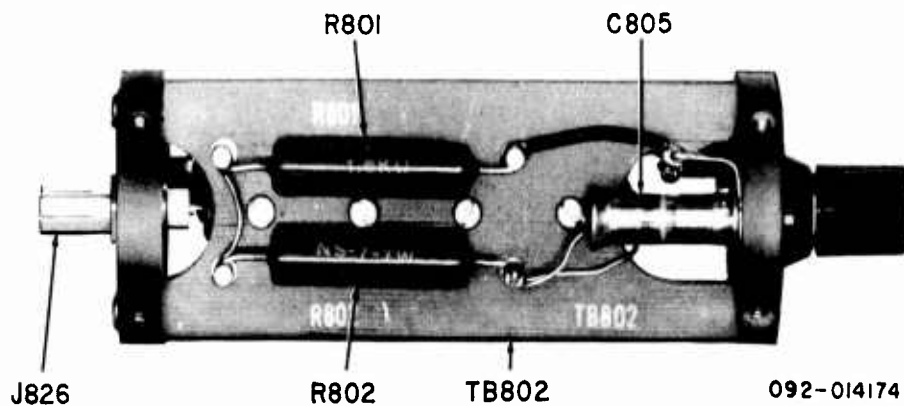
Terminal Board TB802, Sole Modulator Load.
